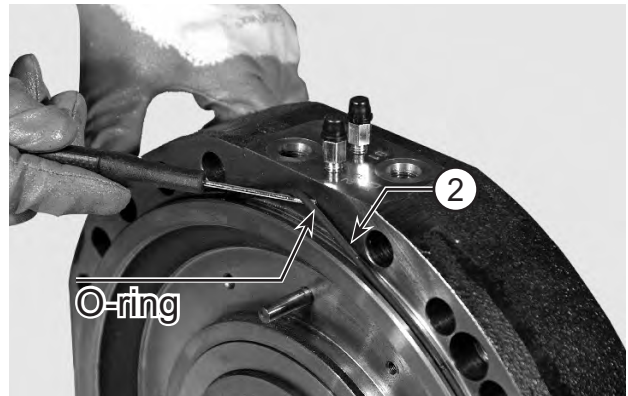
Check integrity and position of the cylinder's o-ring (2).
